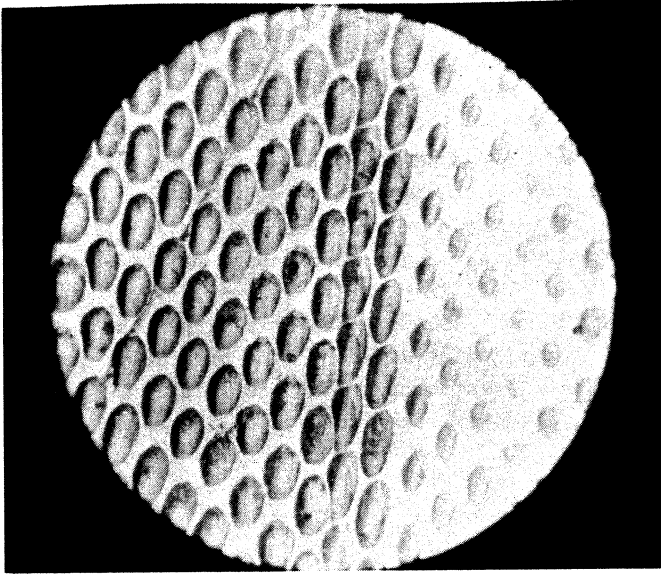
An Engraved Plate After Washing to Remove "Craters".
